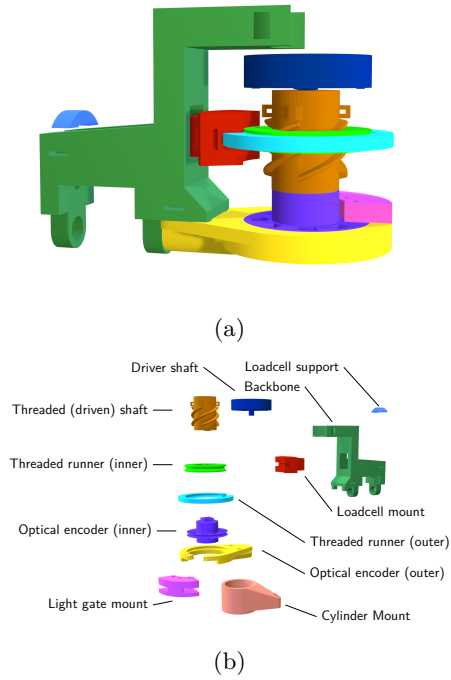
Render of 3D printed parts (a) and labelled exploded-view diagram (b)
